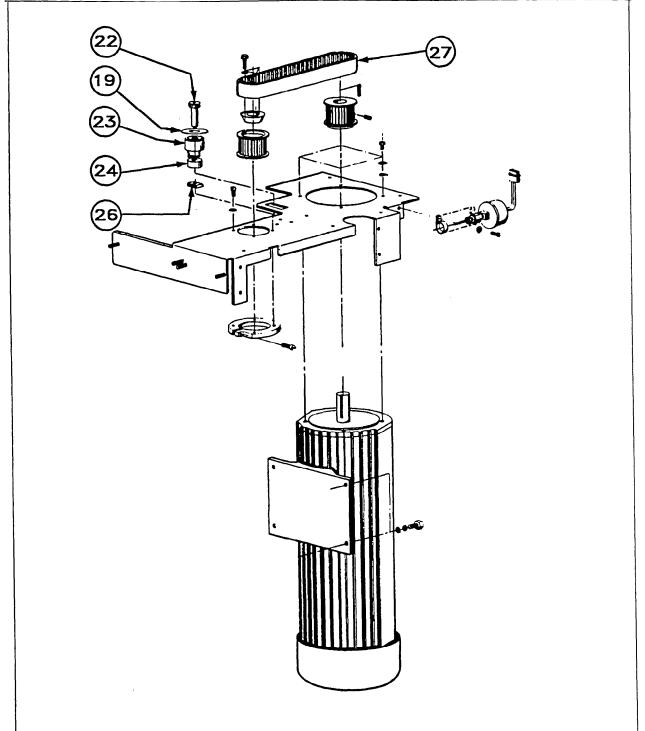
FM-170 Idler Bearing Assembly with New Components (See FM-170 Service Manual for Detailed Parts Identification)
